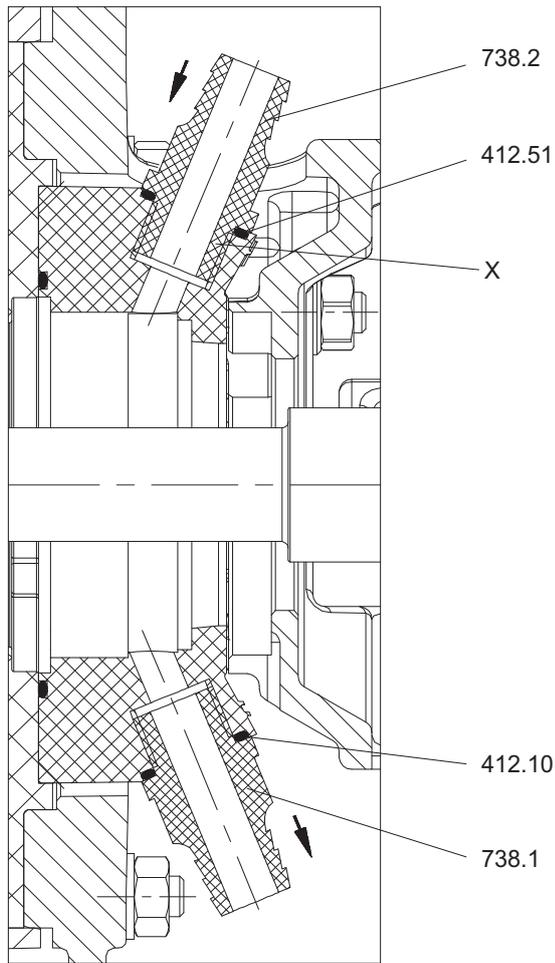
Single mechanical seal unit with spring chamber flushing (supply connectors)
